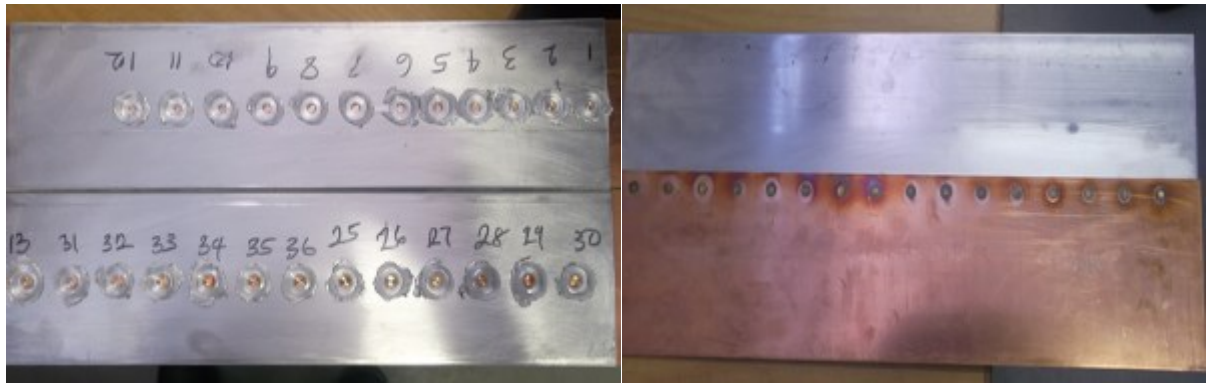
Spot welds produced using different process parameters and tool geometries
